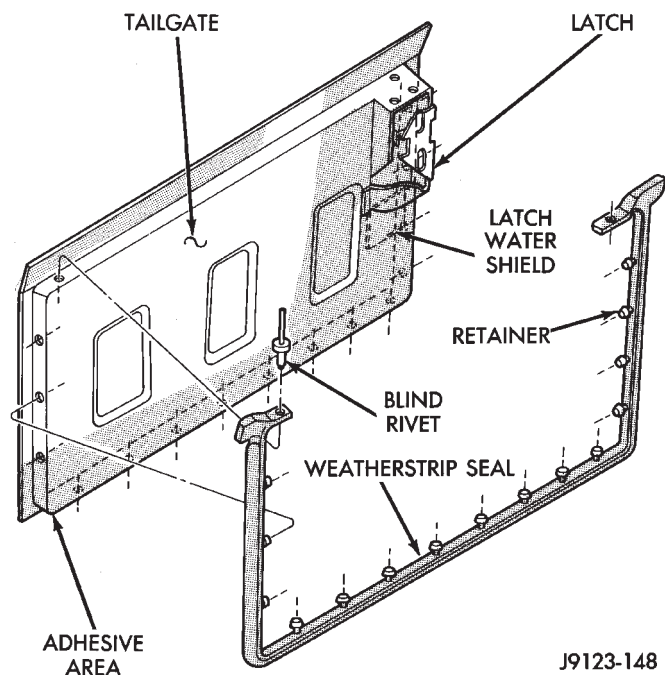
Tailgate Weatherstrip Seal Removal/Installation
